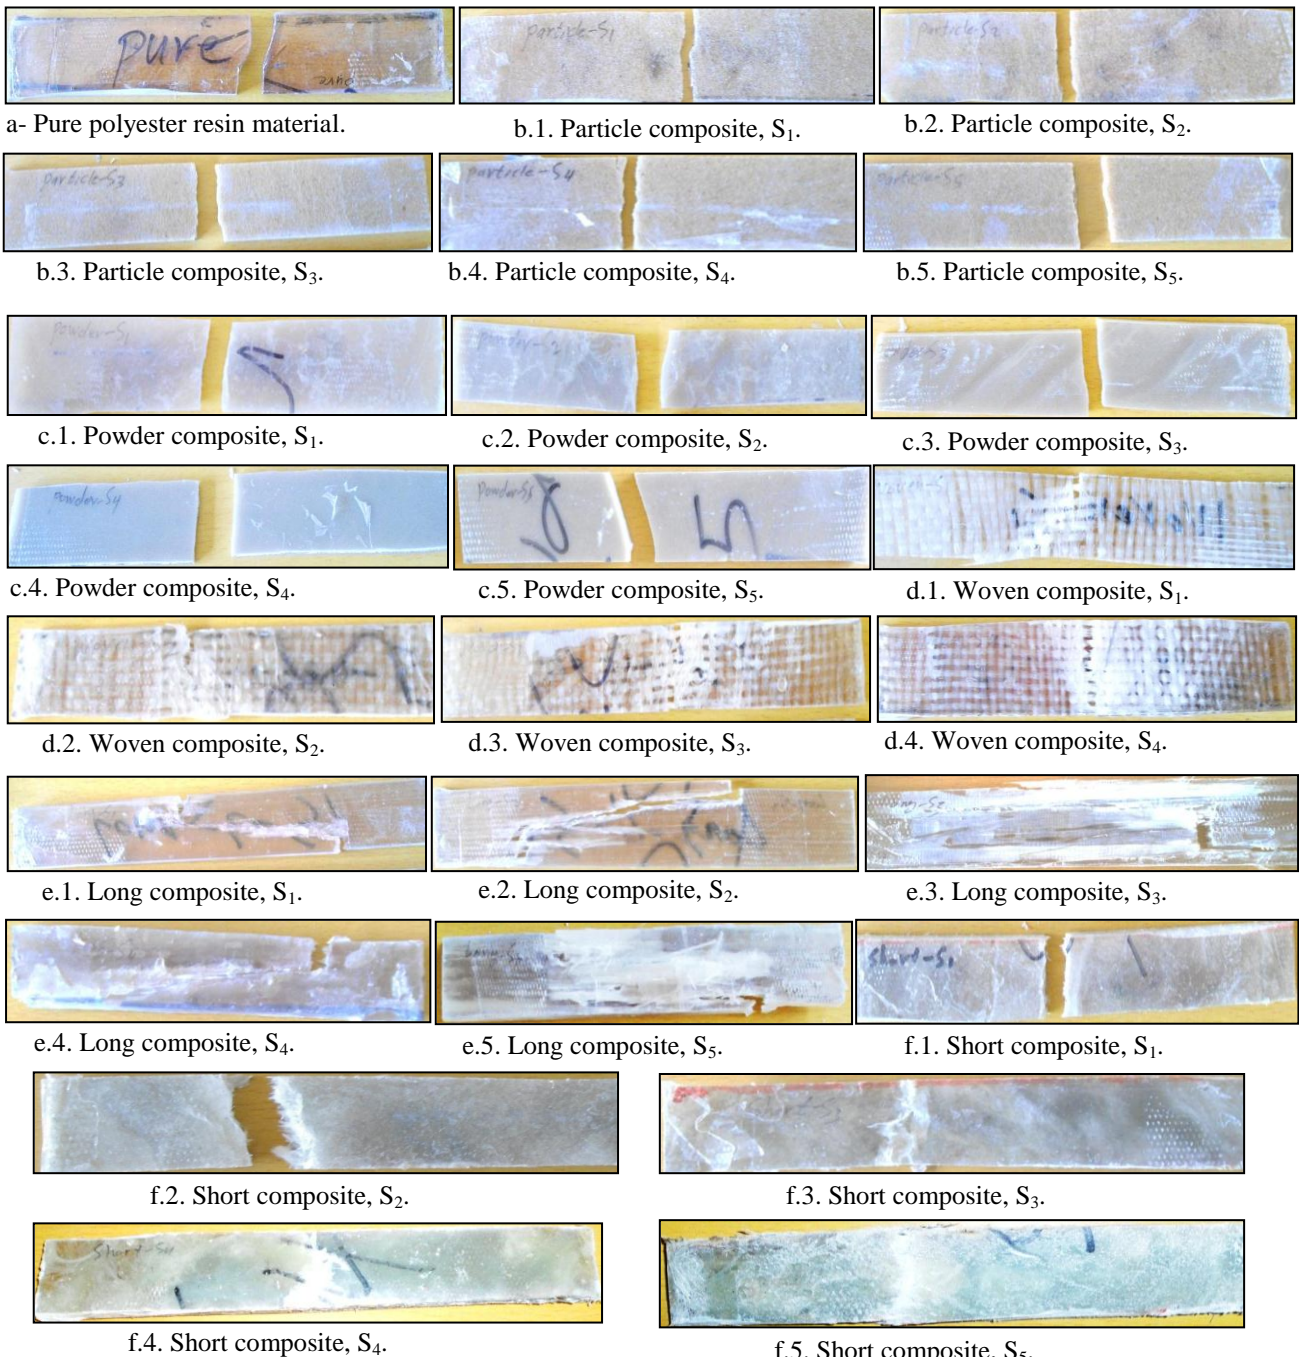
Fracture of composite materials due to tensile loading (by tensile testing).
